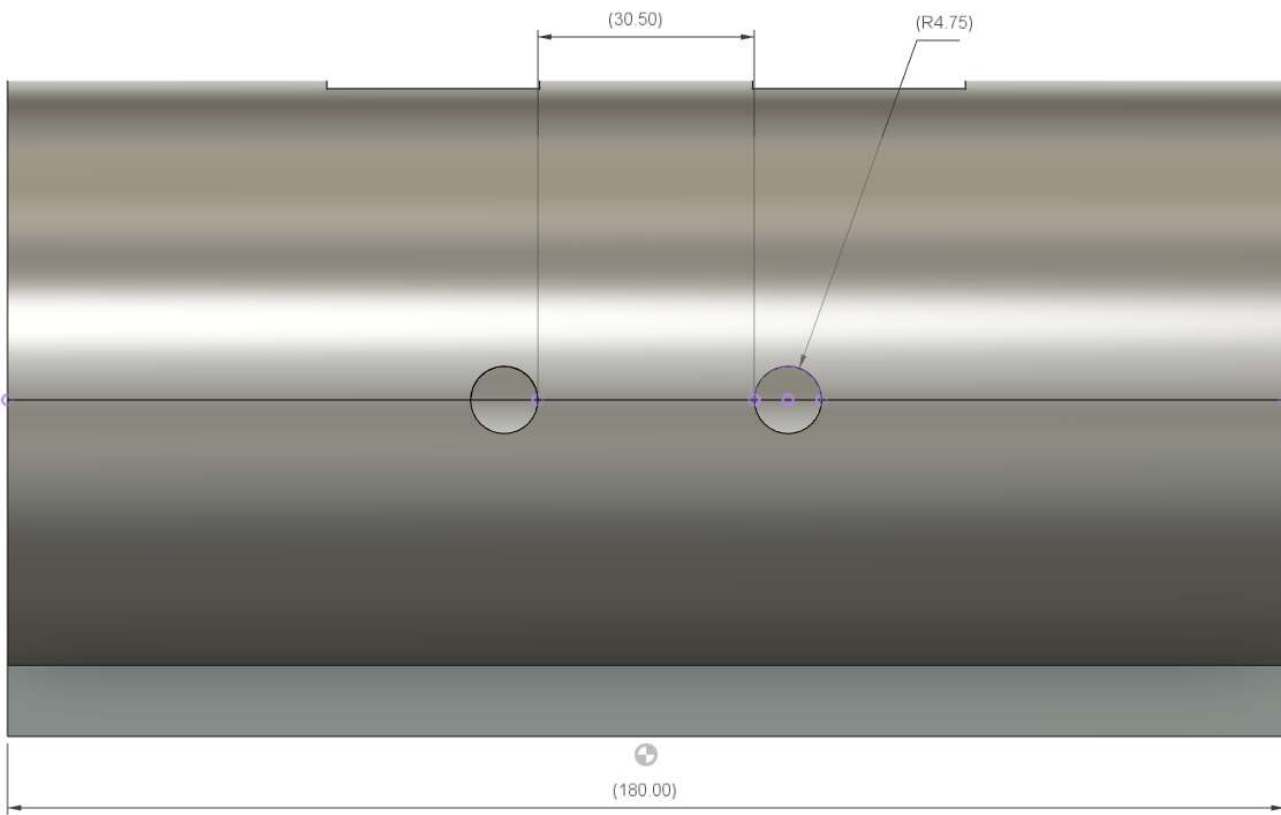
Proposed Ear-EEG phantom prototype dimensions - Front View
